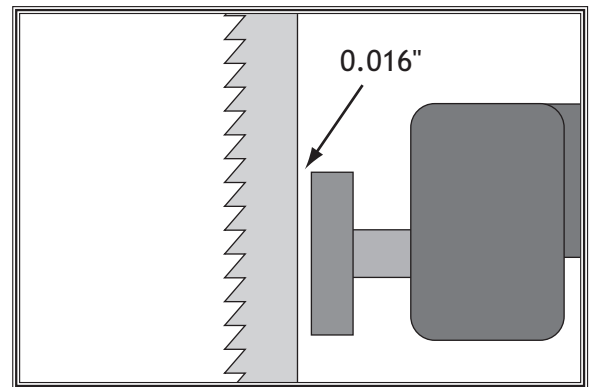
Blade should be aligned approximately 0.016" away from the bearing edge.
